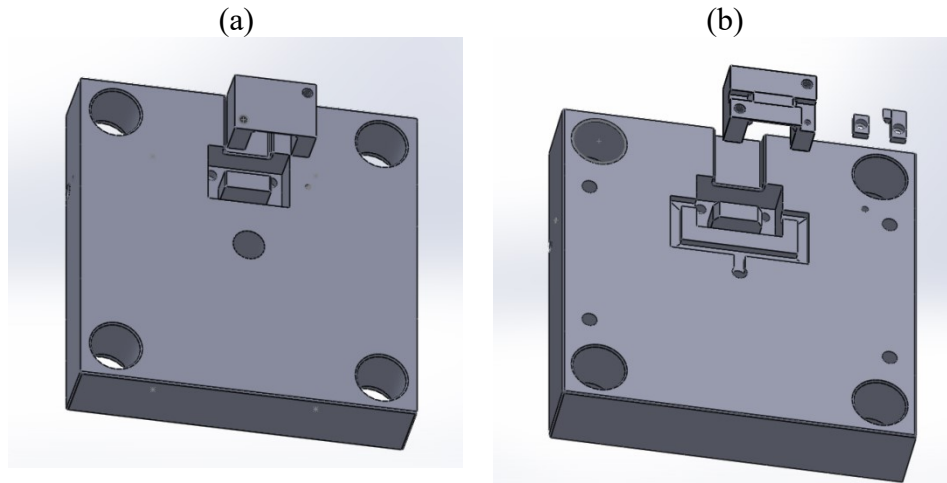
CAD mould design: (a) fixed half (b) moving half.
